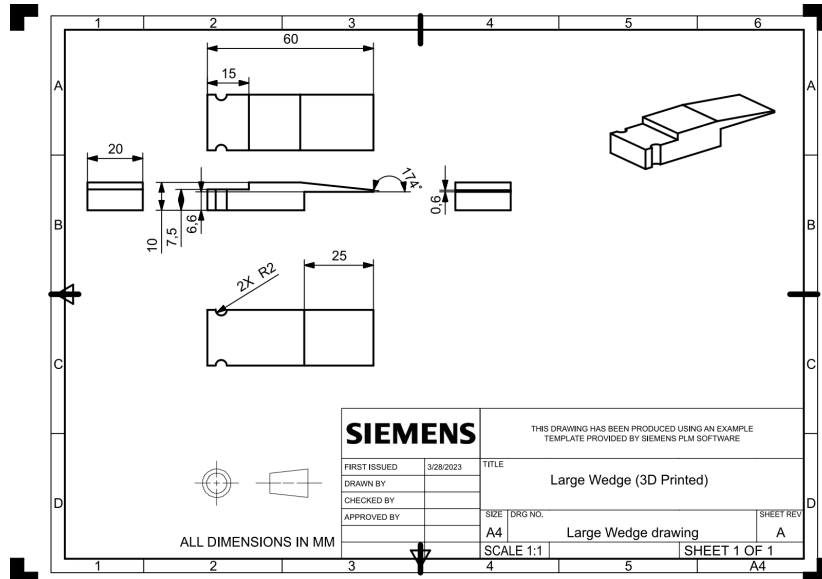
Engineering Drawing of the Large Wedge (3D Printed)
